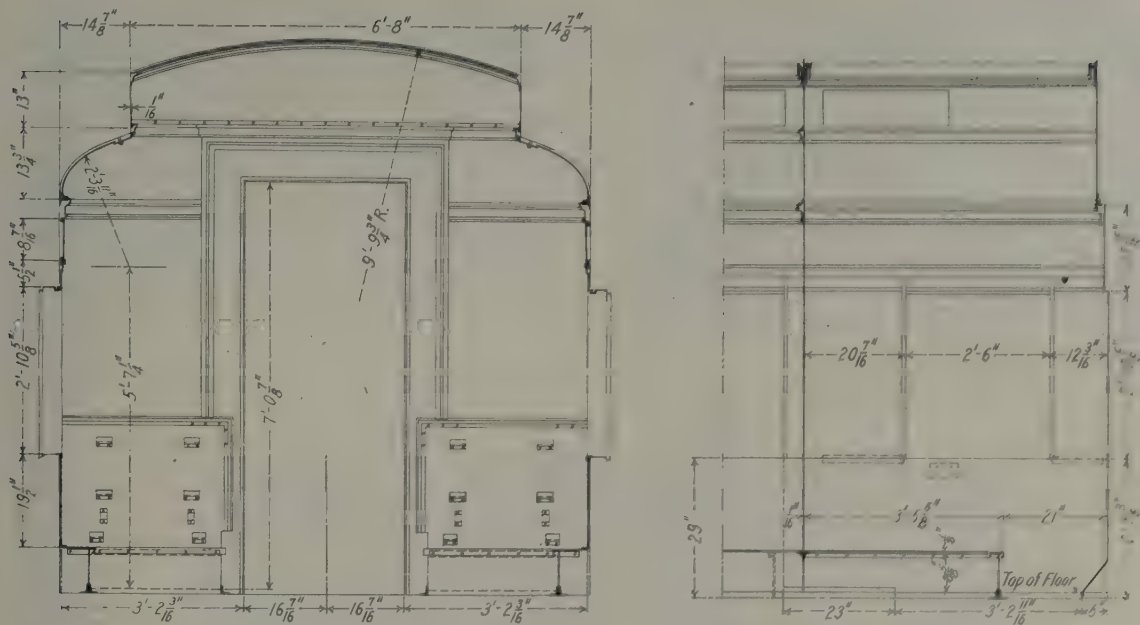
Steel Interior Finish for Passenger Coach. Art Metal Construction Company.
